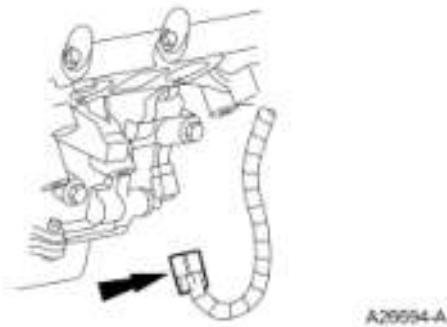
Identifying LH Radio Ignition Interference Capacitor And Stud Bolt
